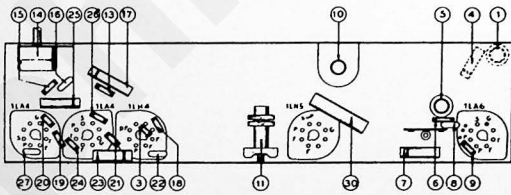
LOCATIONS OF PARTS — UNDERSIDE OF CHASSIS — MODEL 42-122.
